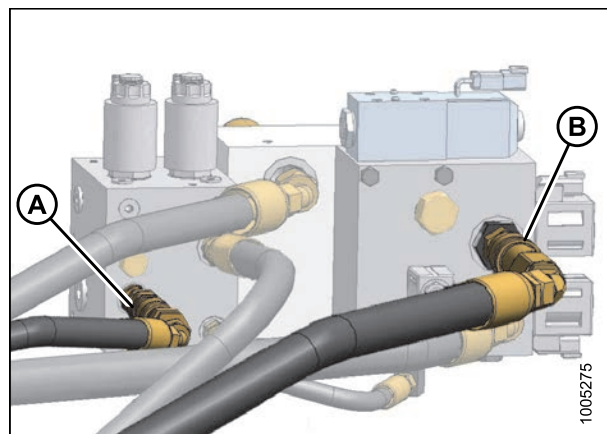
M150/M155/M155E4 with Reverser Valve
